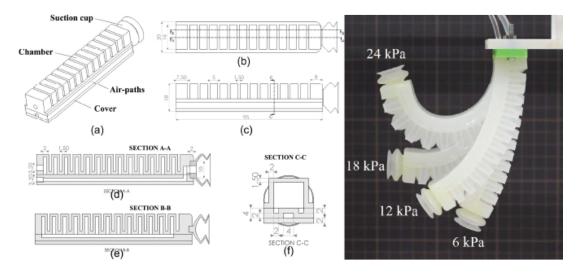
Soft Actuator Technical Drawing and Bending Under Different Pressures [13].
